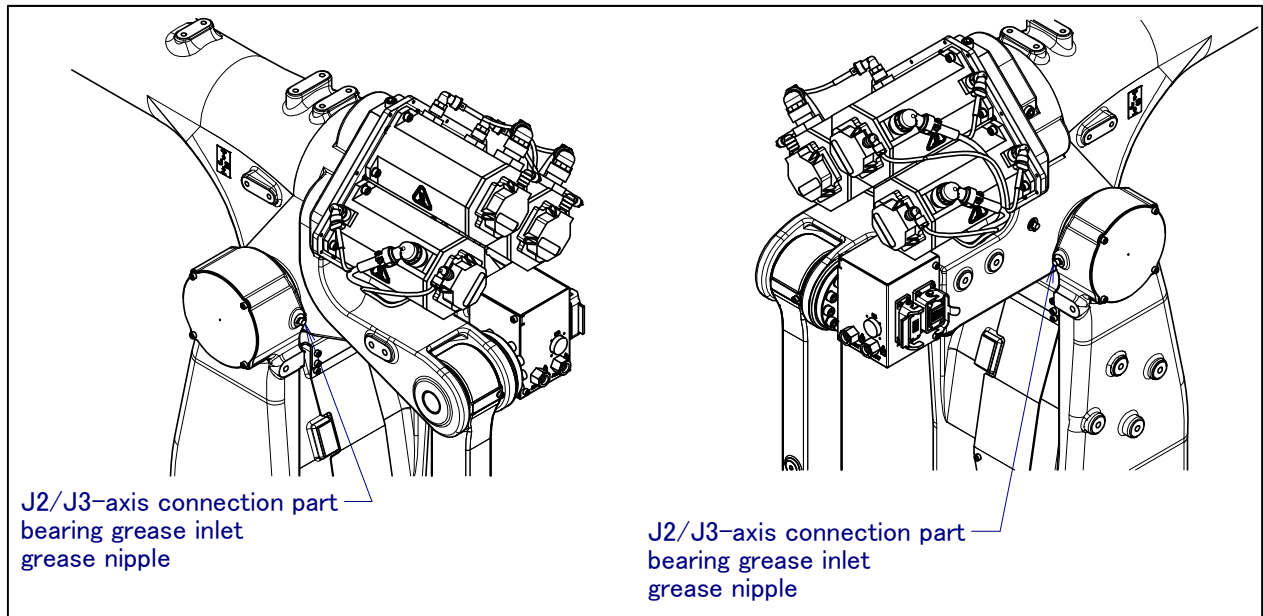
(a) J2/J3-axis connection part bearing greasing points
